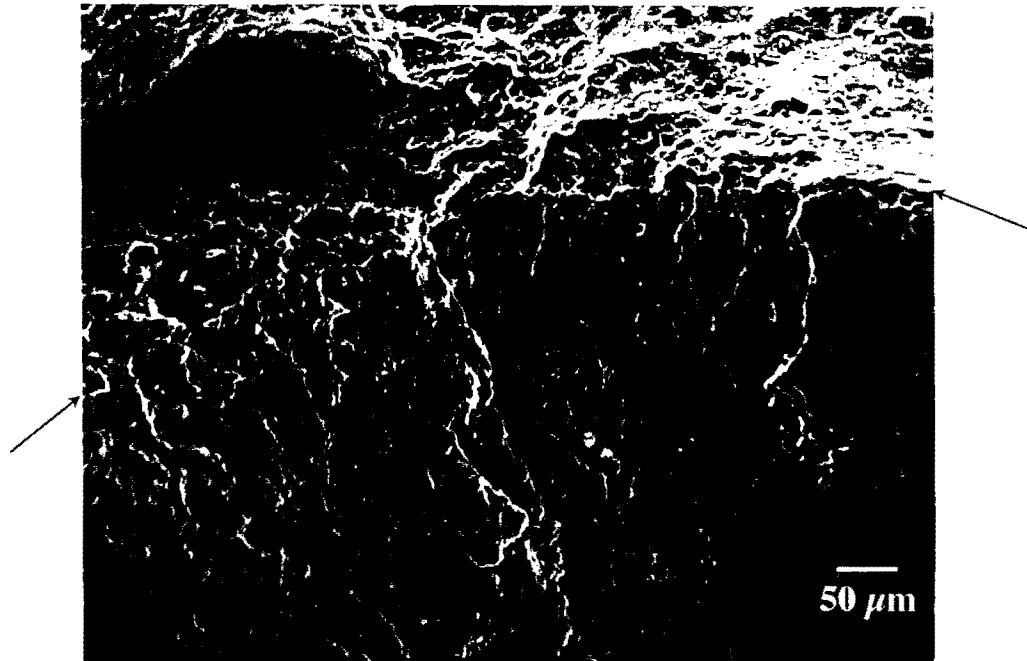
Micrograph of the fracture surface of a specimen with arrows indicating the boundary between the fatigue crack and the dimpled ductile fracture resulting from pulling the specimen apart. (240,000 cycles)
